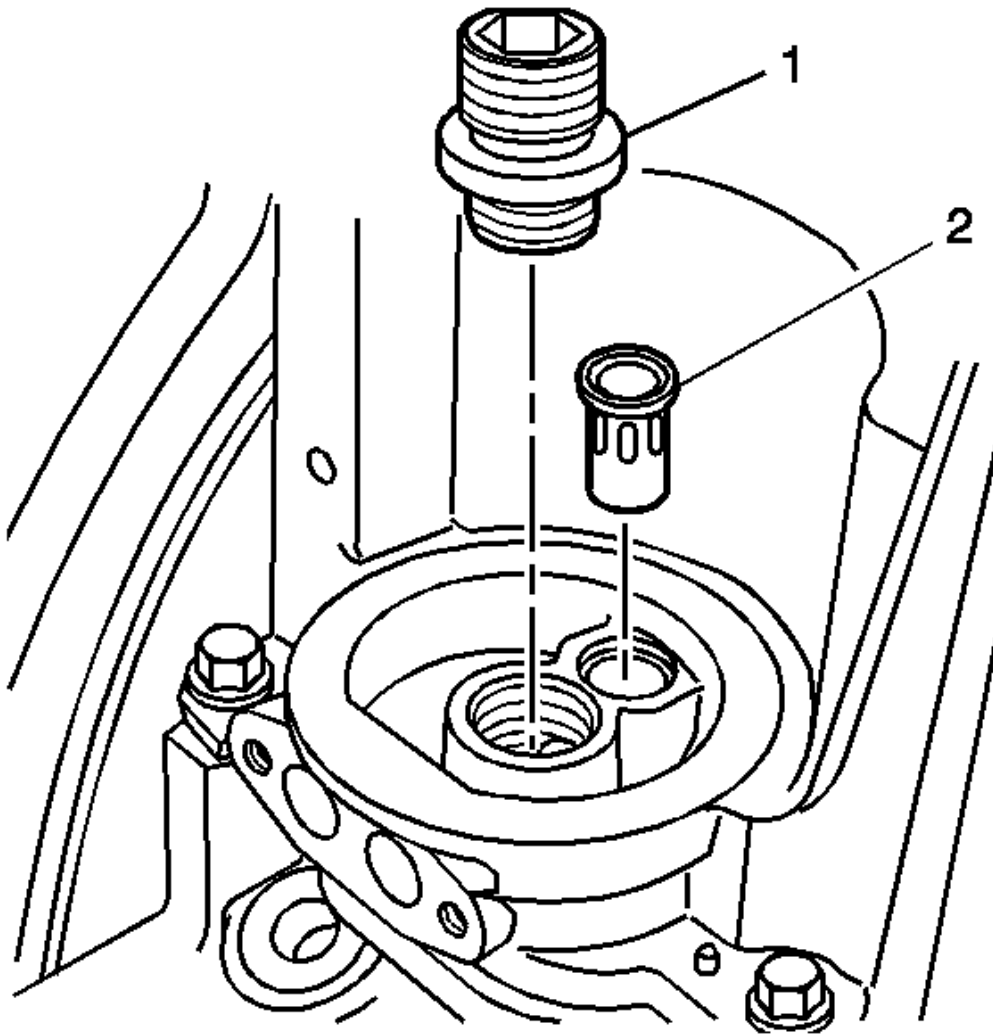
View Of Oil Filter Adapter & Bypass Valve
